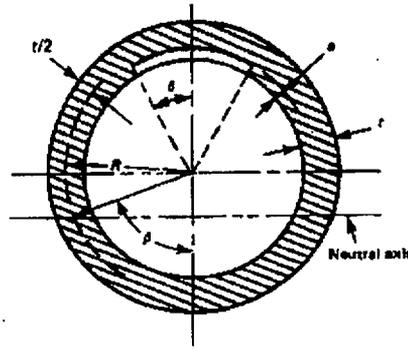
CROSS SECTION OF FLAWED PIPE
